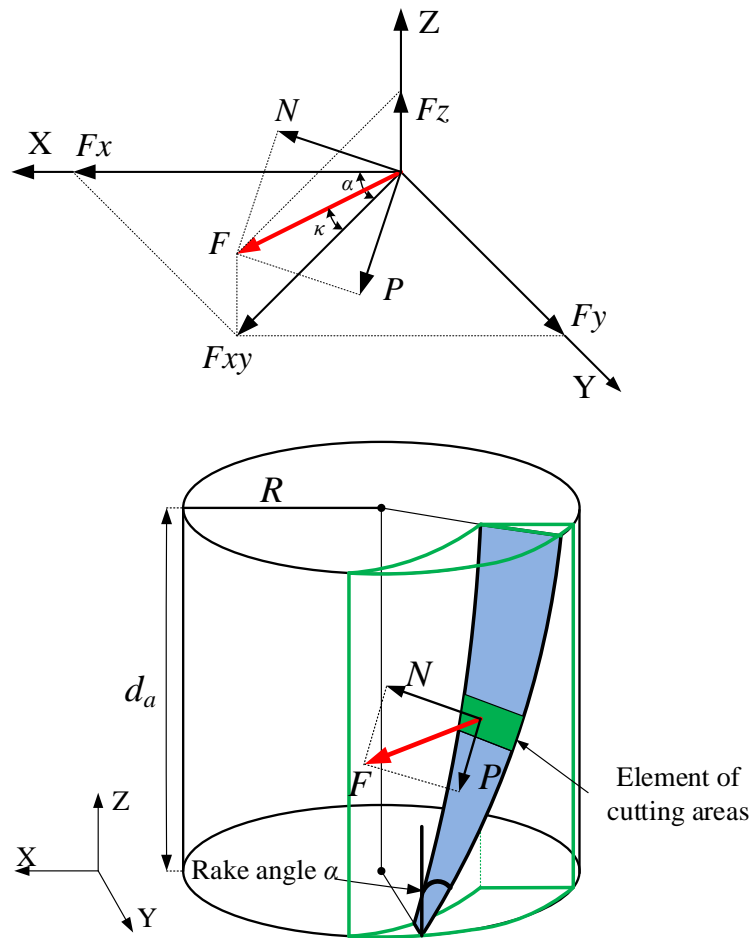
Cutting force definition for tool rake face⁹⁾.
